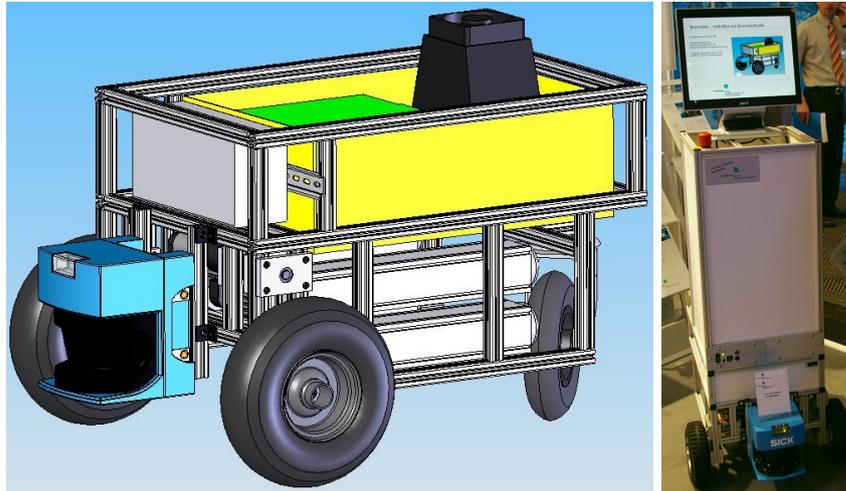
CAD assembly and image of VolksBot Fuel Cell
